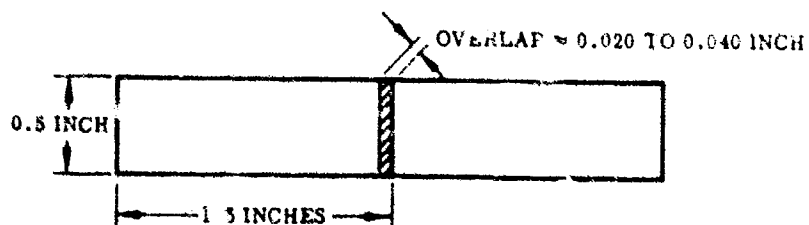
TYPICAL T-JOINT SPECIMEN FOR TENSILE TESTS
